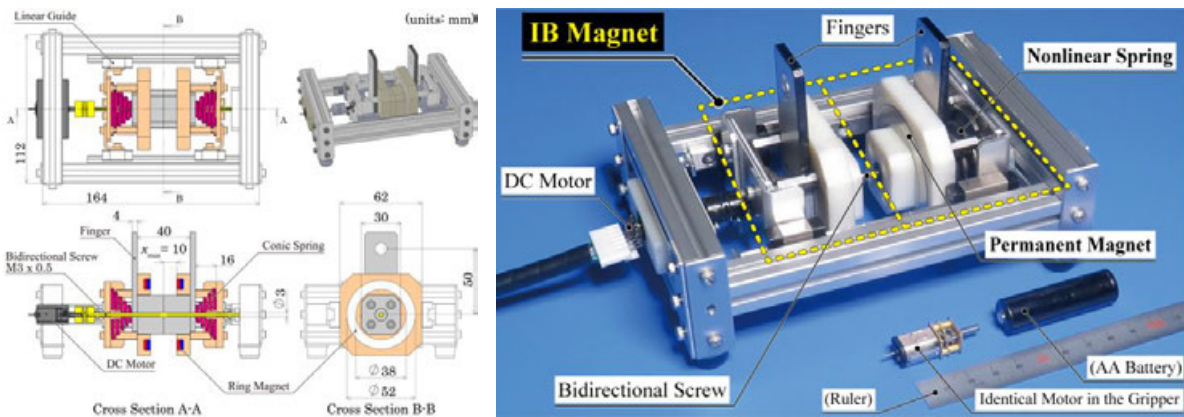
Design and appearance of the prototype of the bi-parting IB magnet using the magnetic spring with a fixed clamping width.
